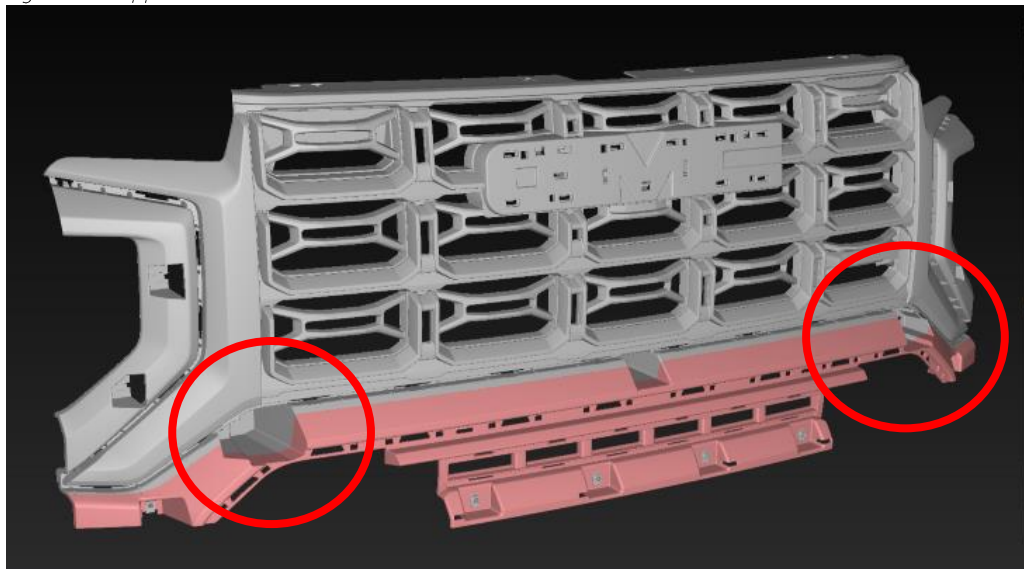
Upper Fascia without headlights (Pink area to be removed)
